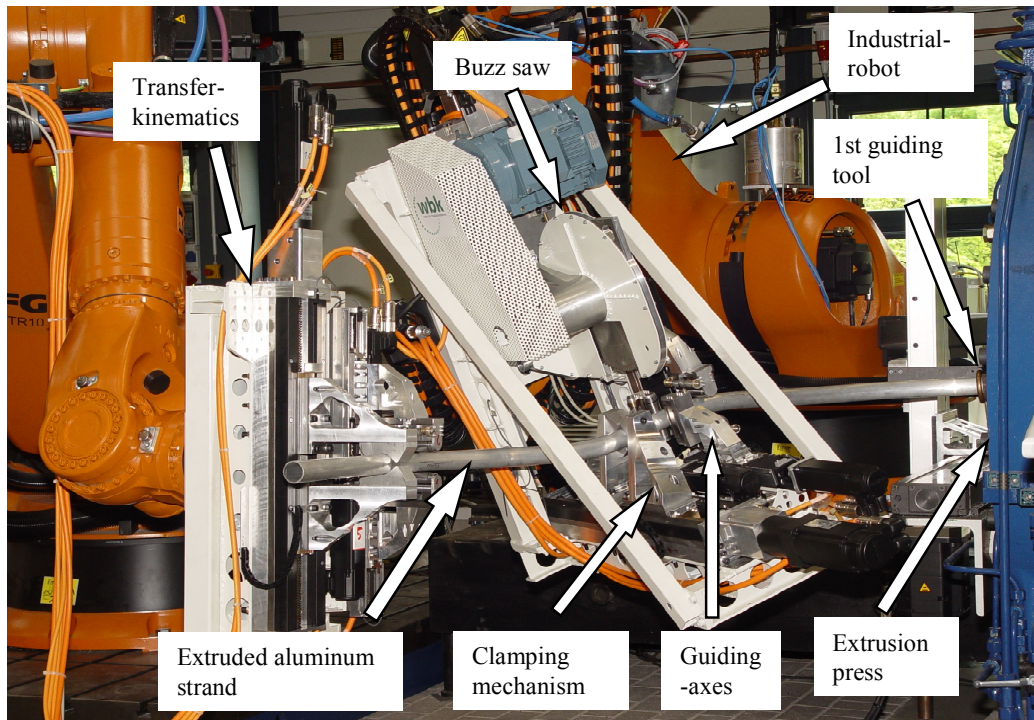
Prototype of the flying cutting device (wbk, iul) [2]
